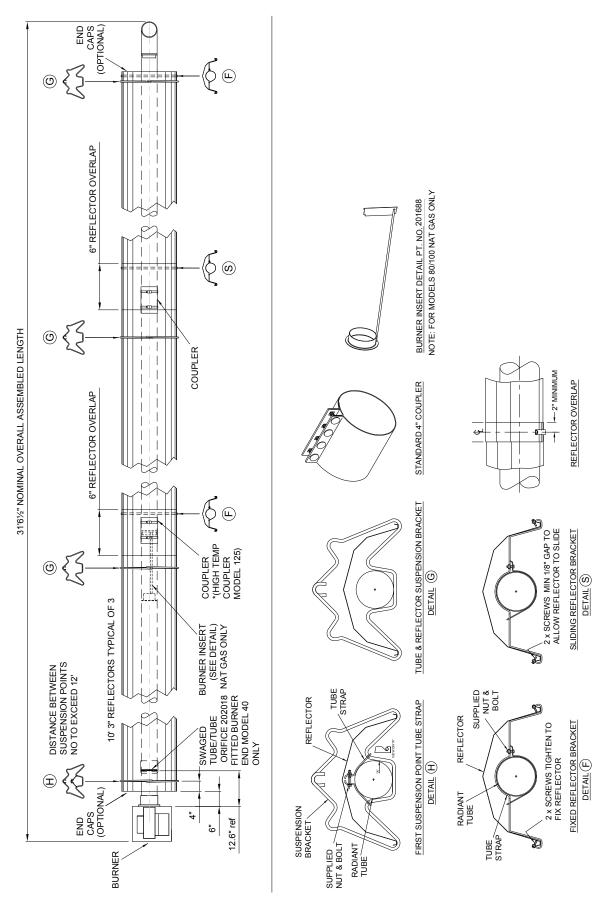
Heater Assembly: Model Linear 60-S40, 80-S40, 100-S40, 125-S40 and 150-S40.
